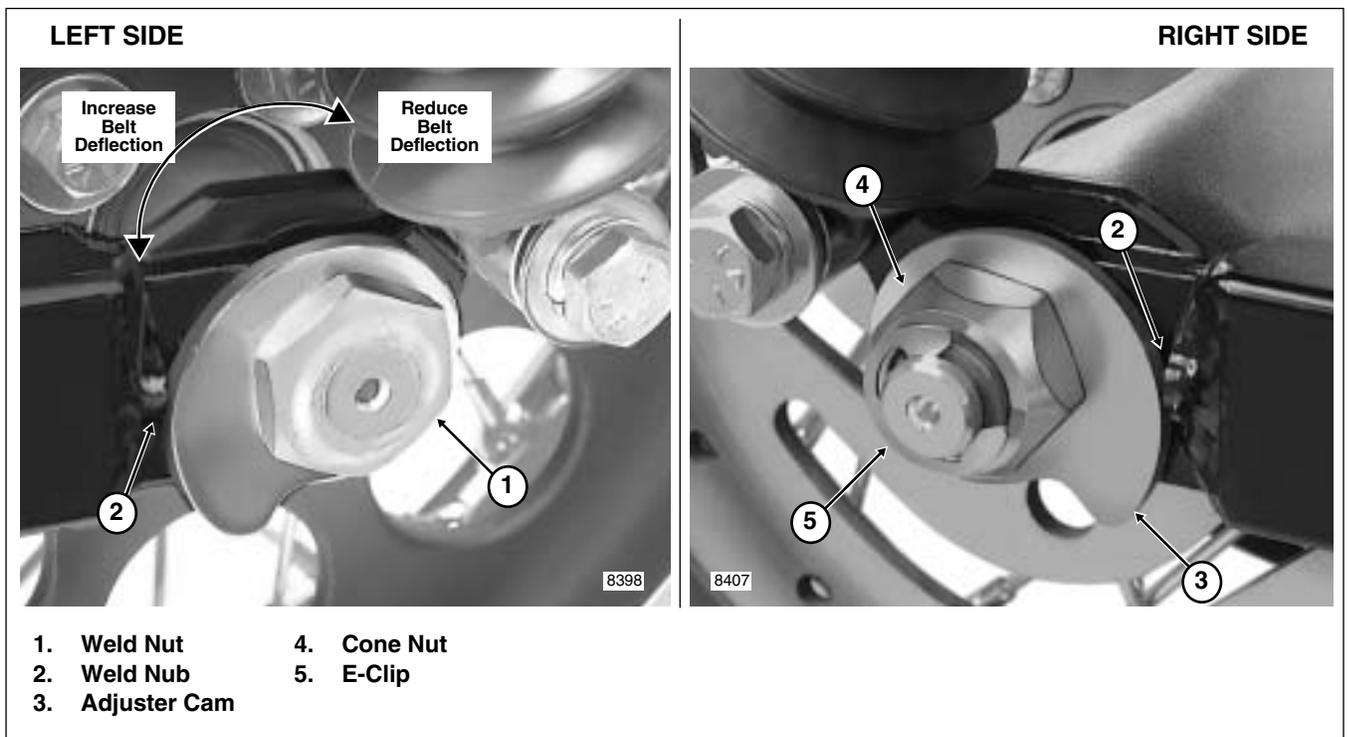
Move Rear Wheel Forward Until Adjuster Cams Just Contact Weld Nubs
